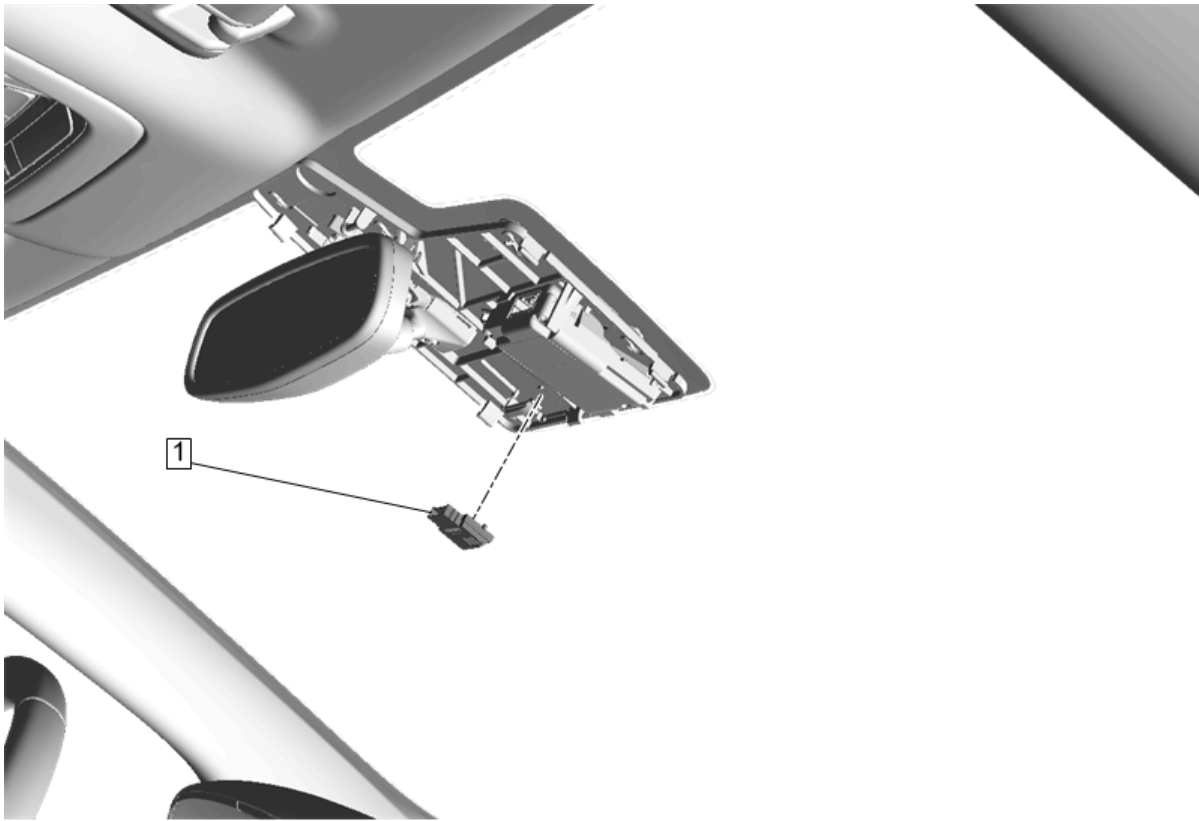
Inside Air Moisture And Windshield Temperature Sensor
